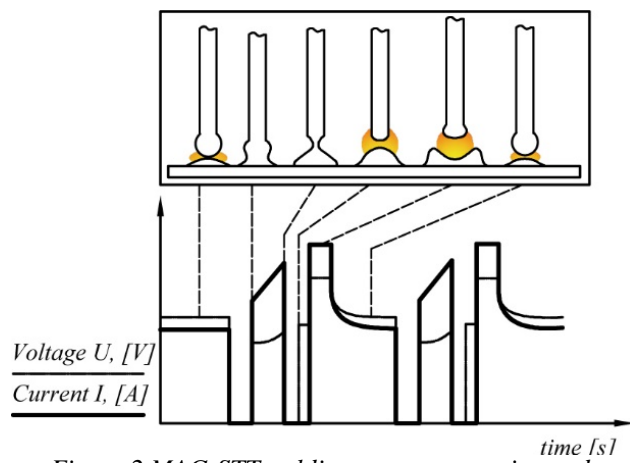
MAG-STT welding process- creation and transfer of droplet
